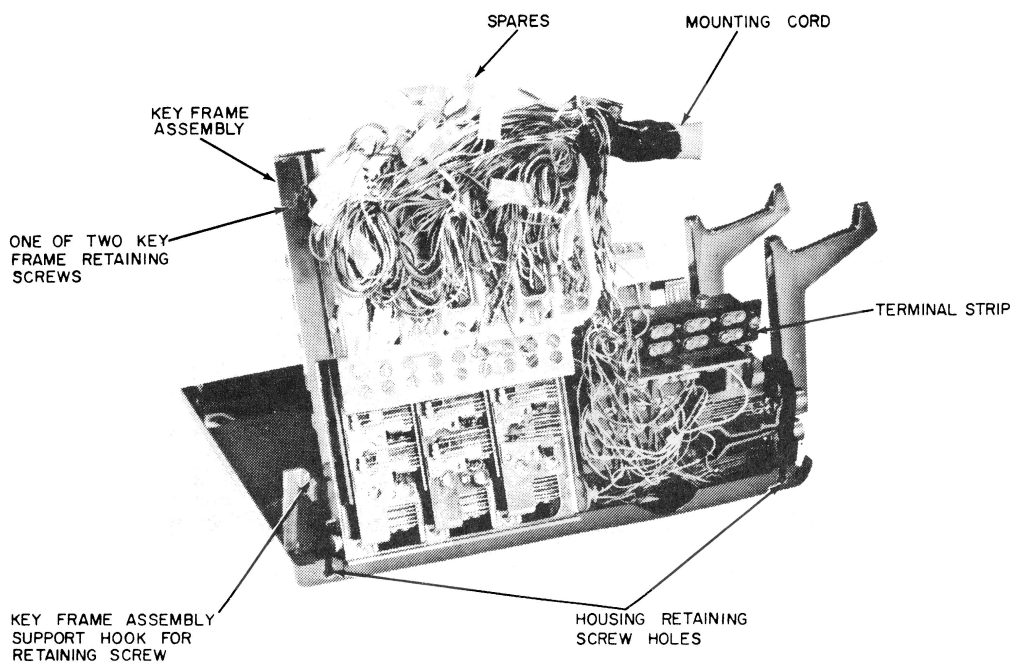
Rear View of WECO Type 618BW Telephone Set Showing Underside of Key Frame Assembly.
